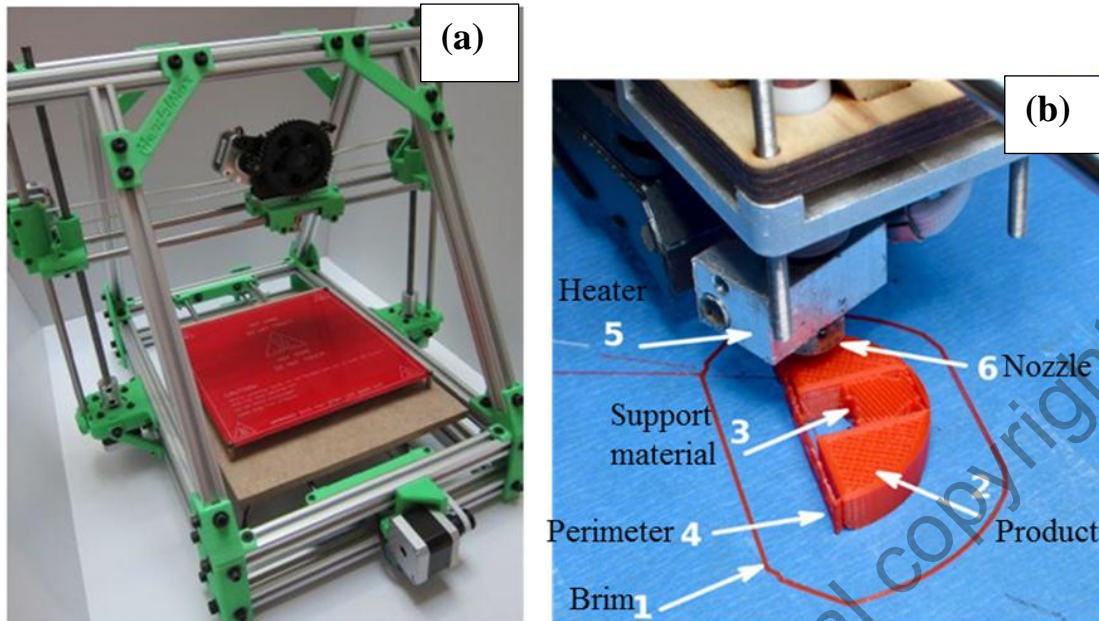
Image of (a) 3D printer MendelMax 1.5 and (b) part fabricated using a 3D printer
